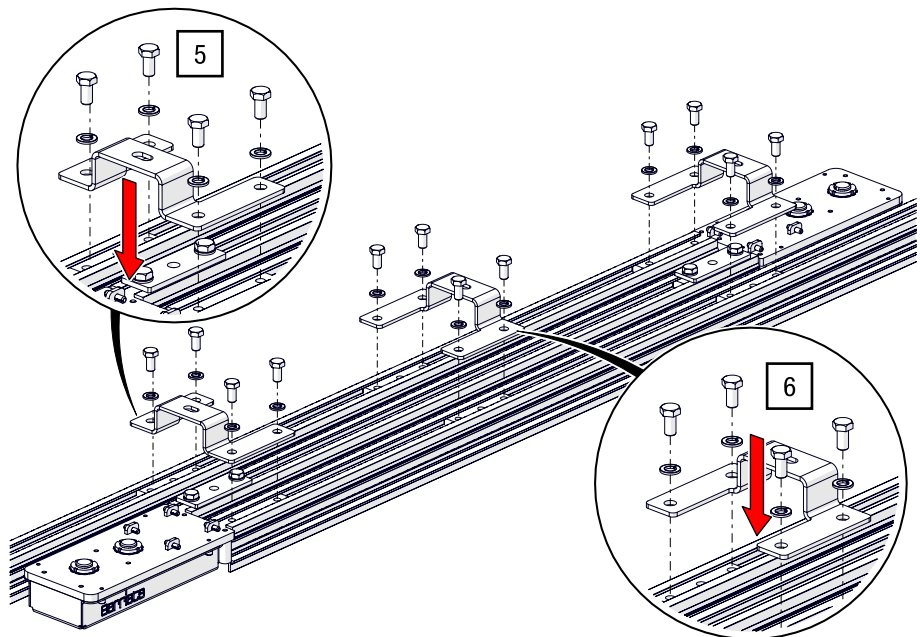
Crossover unit – Mount suspensions and guide the deflection unit
